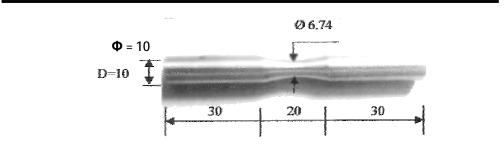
geometry of fatigue creep interaction specimens; dimensions in millimeter according to (DIN 50113) used standard specification
